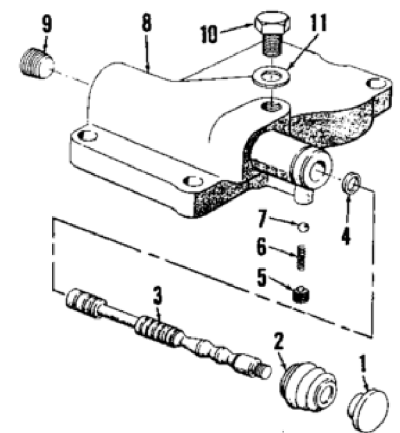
Exploded view of selector valve assembly available for models 2000, 3000 and 4000. Clamp for boot (2) is not shown.
